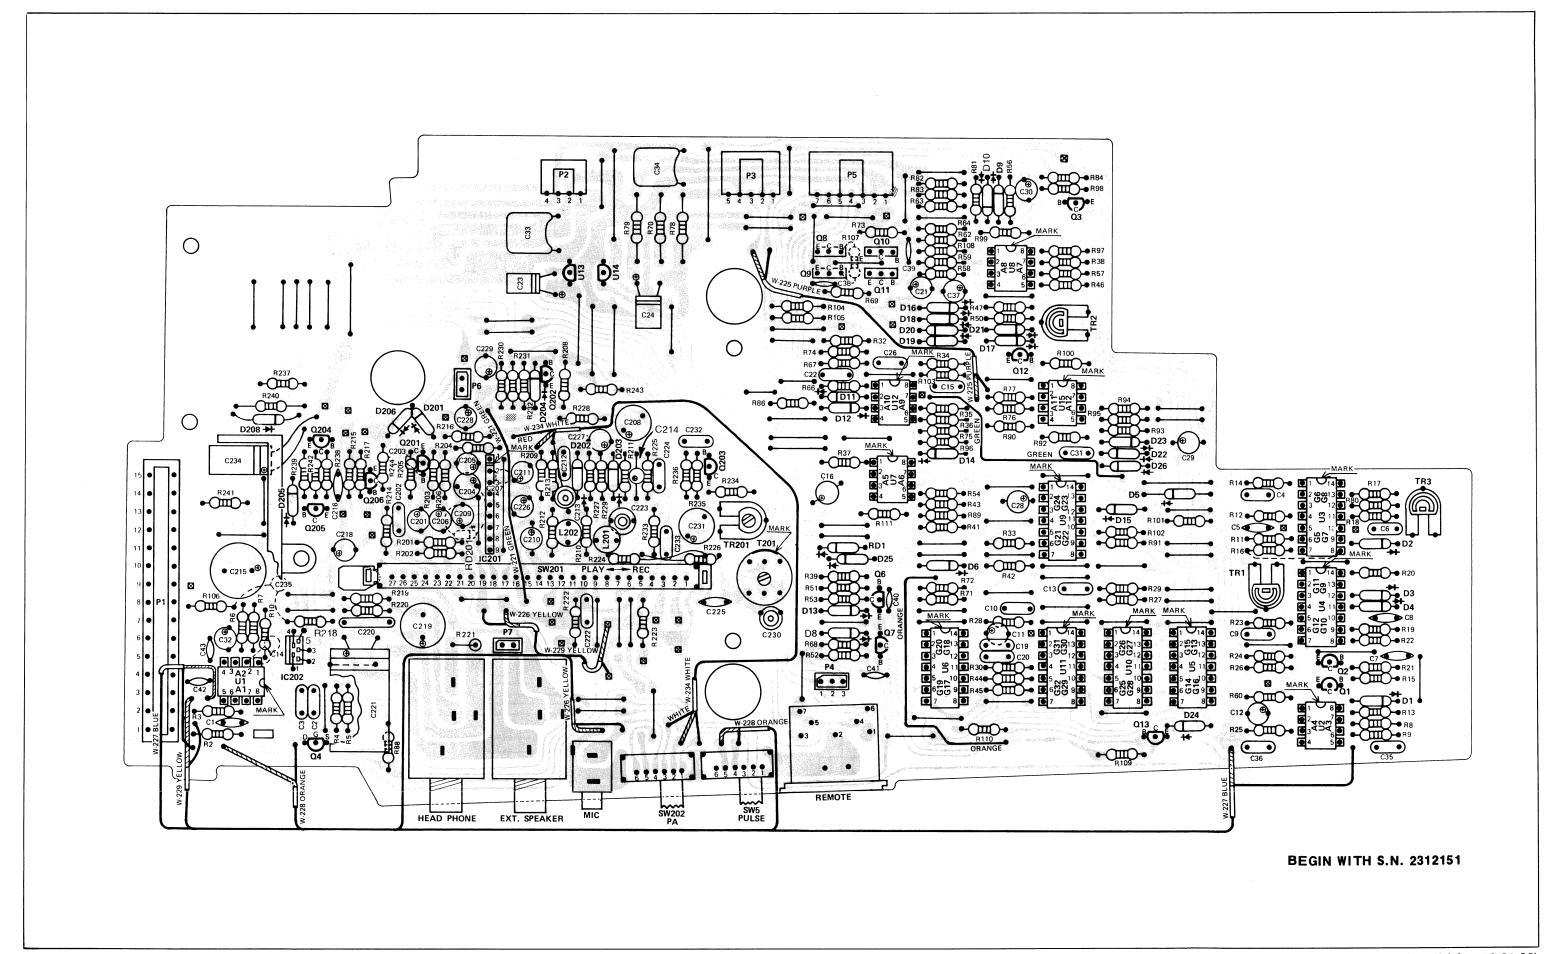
Tape Recorder PCB Assembly - Bottom View (*After 12-31-82)
